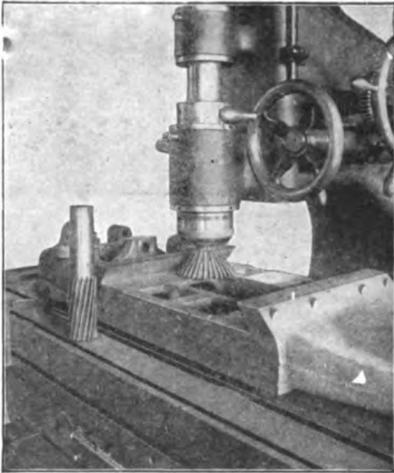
Vertical, Horizontal, and Angular Milling with Two Tools.
